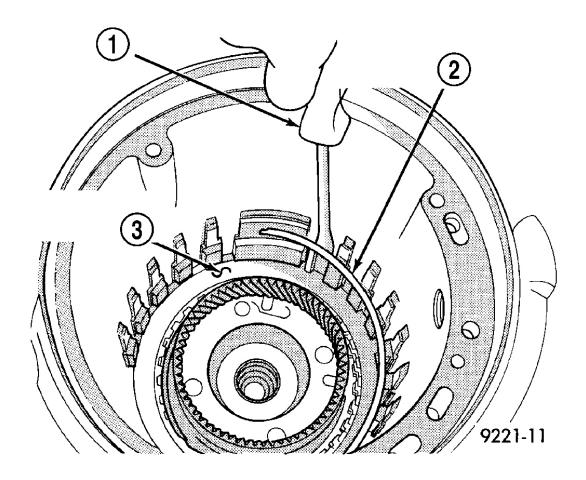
Installing Low/Reverse Clutch Pack Courtesy of CHRYSLER LLC
